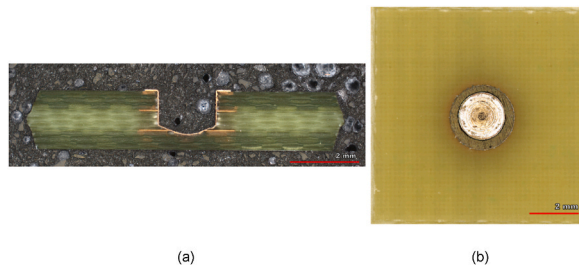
Testing board design: (a) cross-section view; (b) top view.
